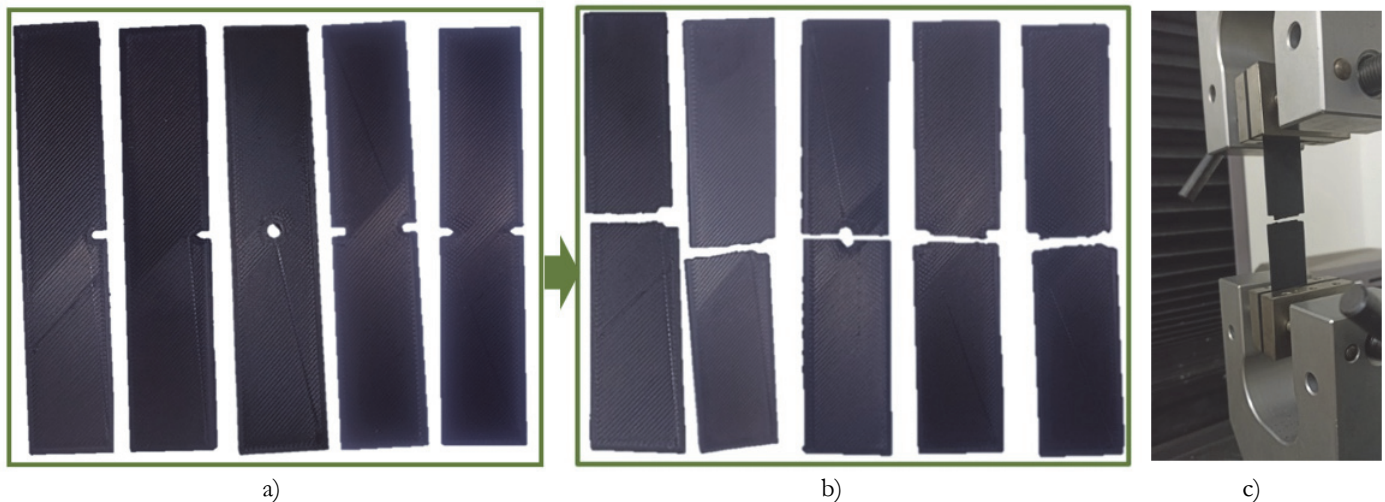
a) Printed specimens for tensile test. b) Specimens after rupture. c) One Specimen under tensile testing via MTS Testing Machine.
